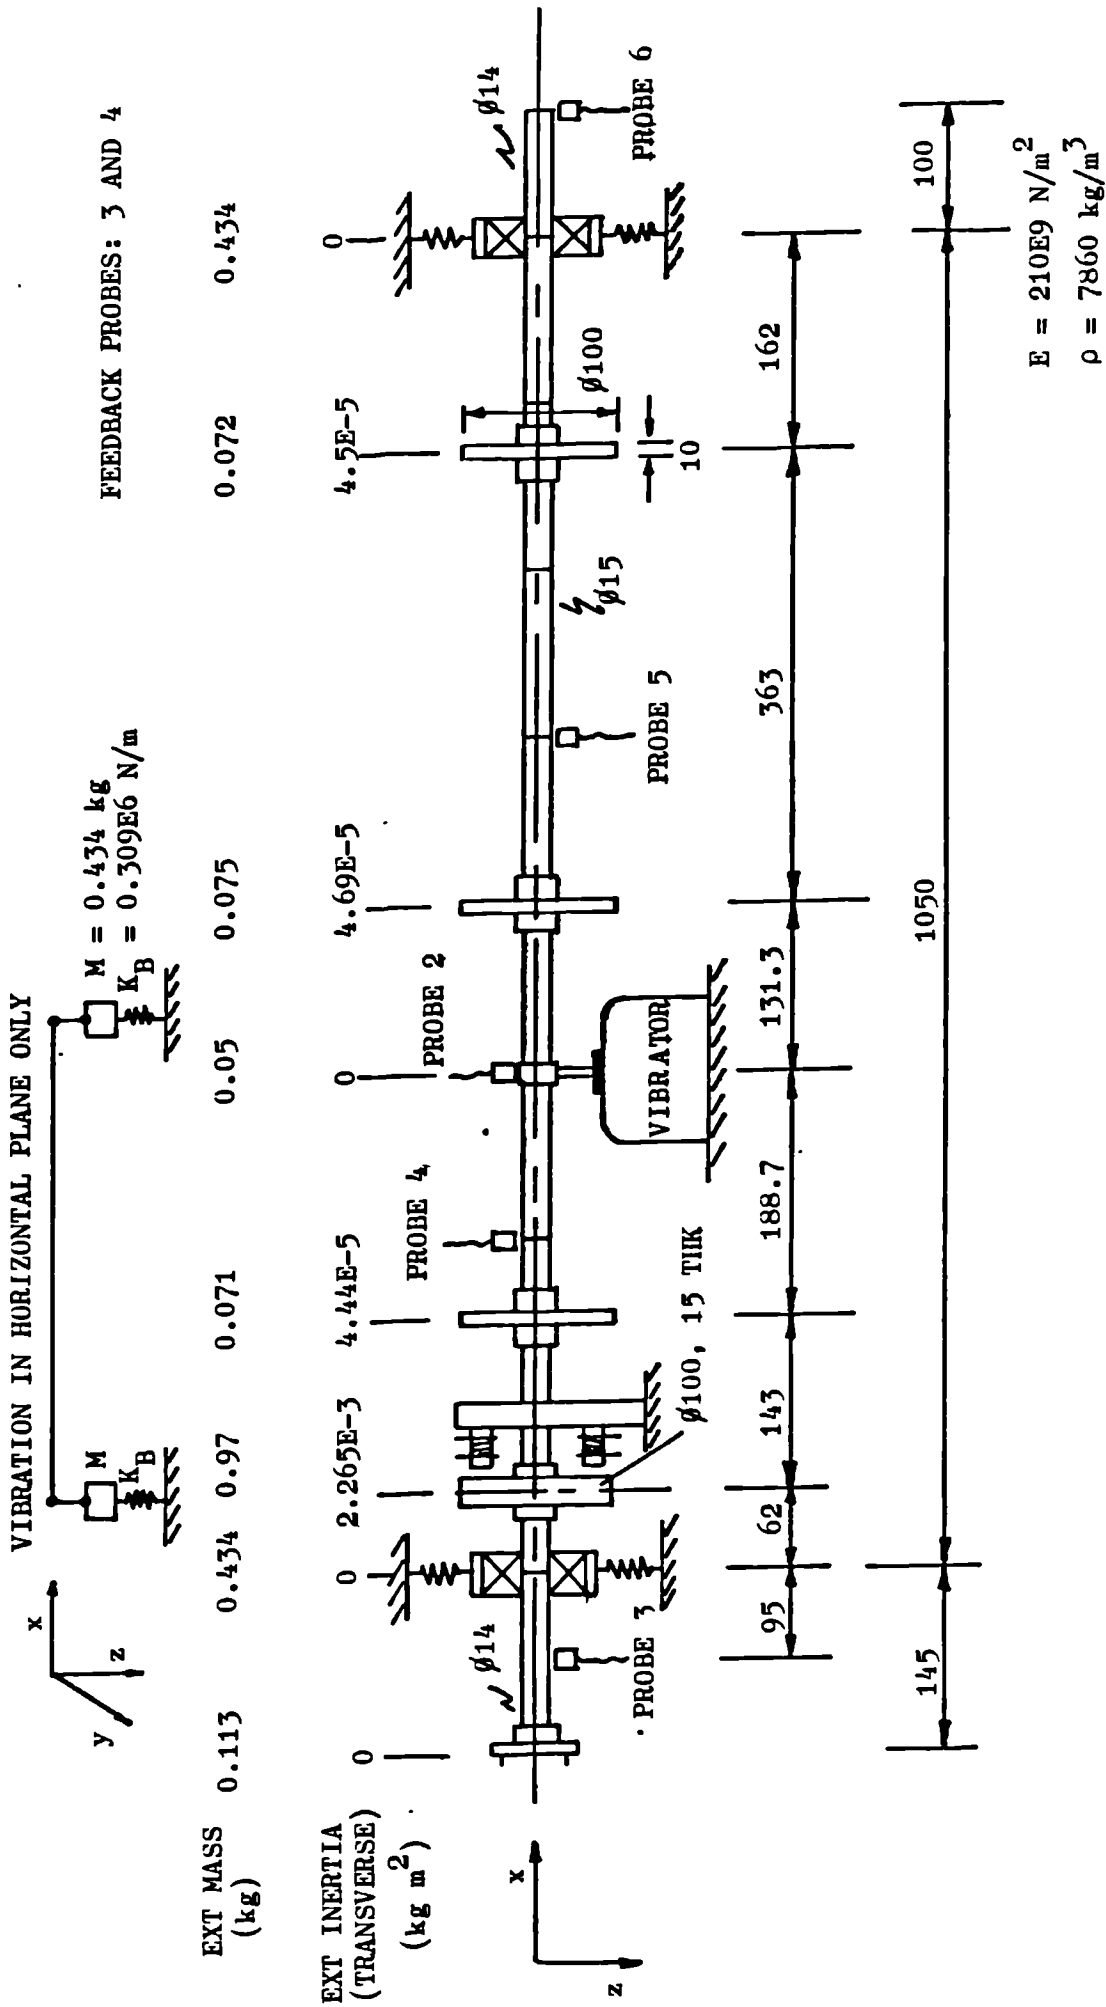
SHAFT ARRANGEMENT FOR TEST 5
